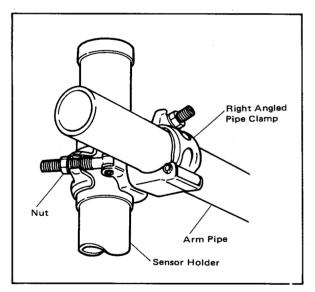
Sensor Holder Removal (Pipe Mounting Type without Cleaner).
